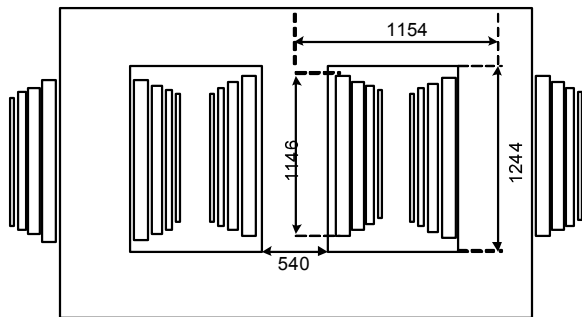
Primitive geometry details of analyzed power transformer (dimensions are in mm)
